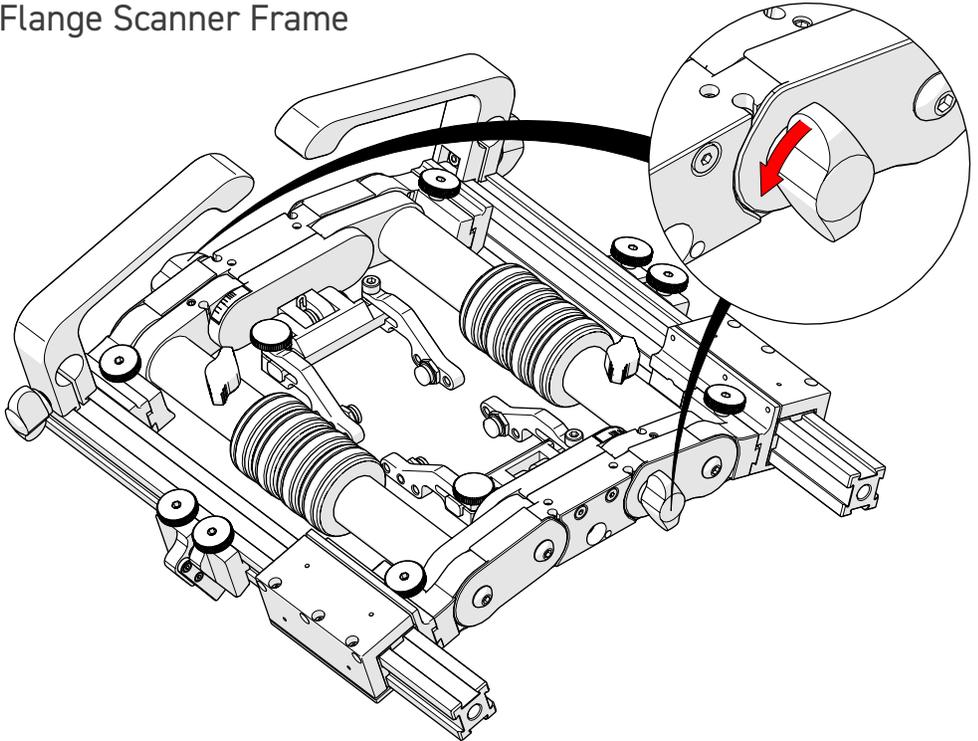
Loosen black wing knobs to loosen the flange scanner's pivot
